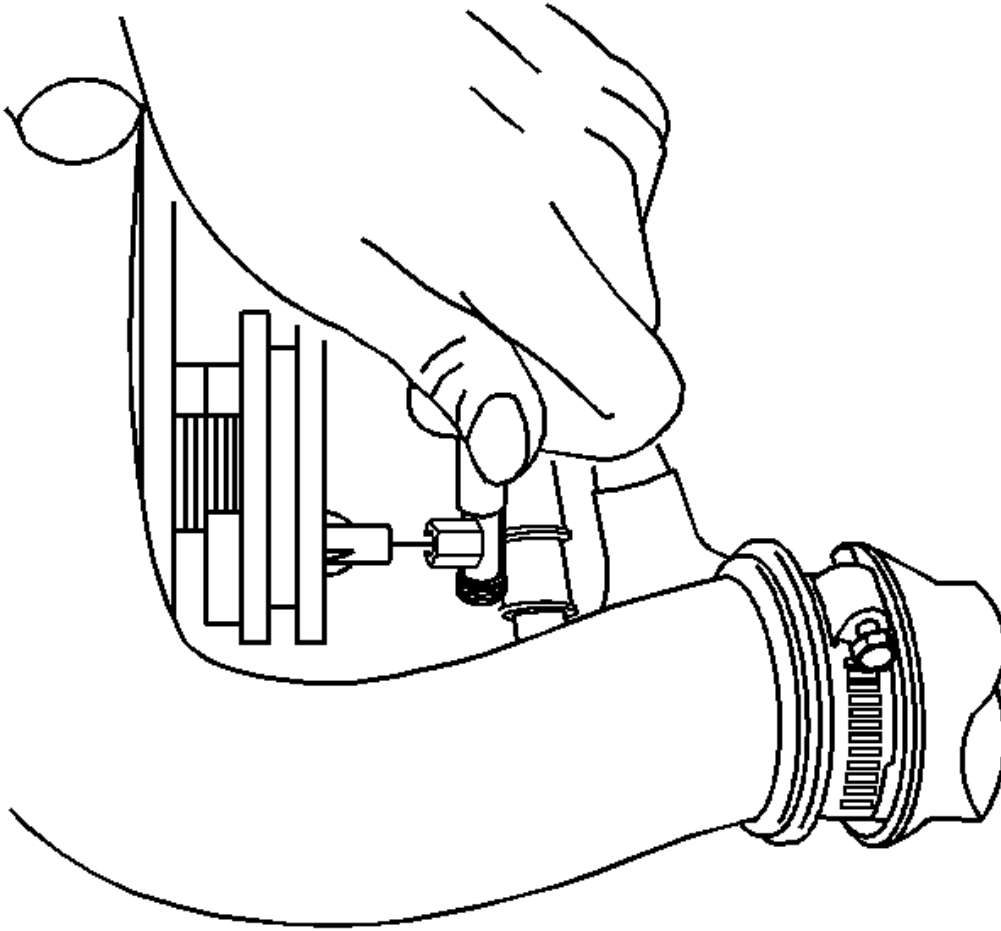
View Of Cruise Control Cable At Throttle Body Cam Lever
